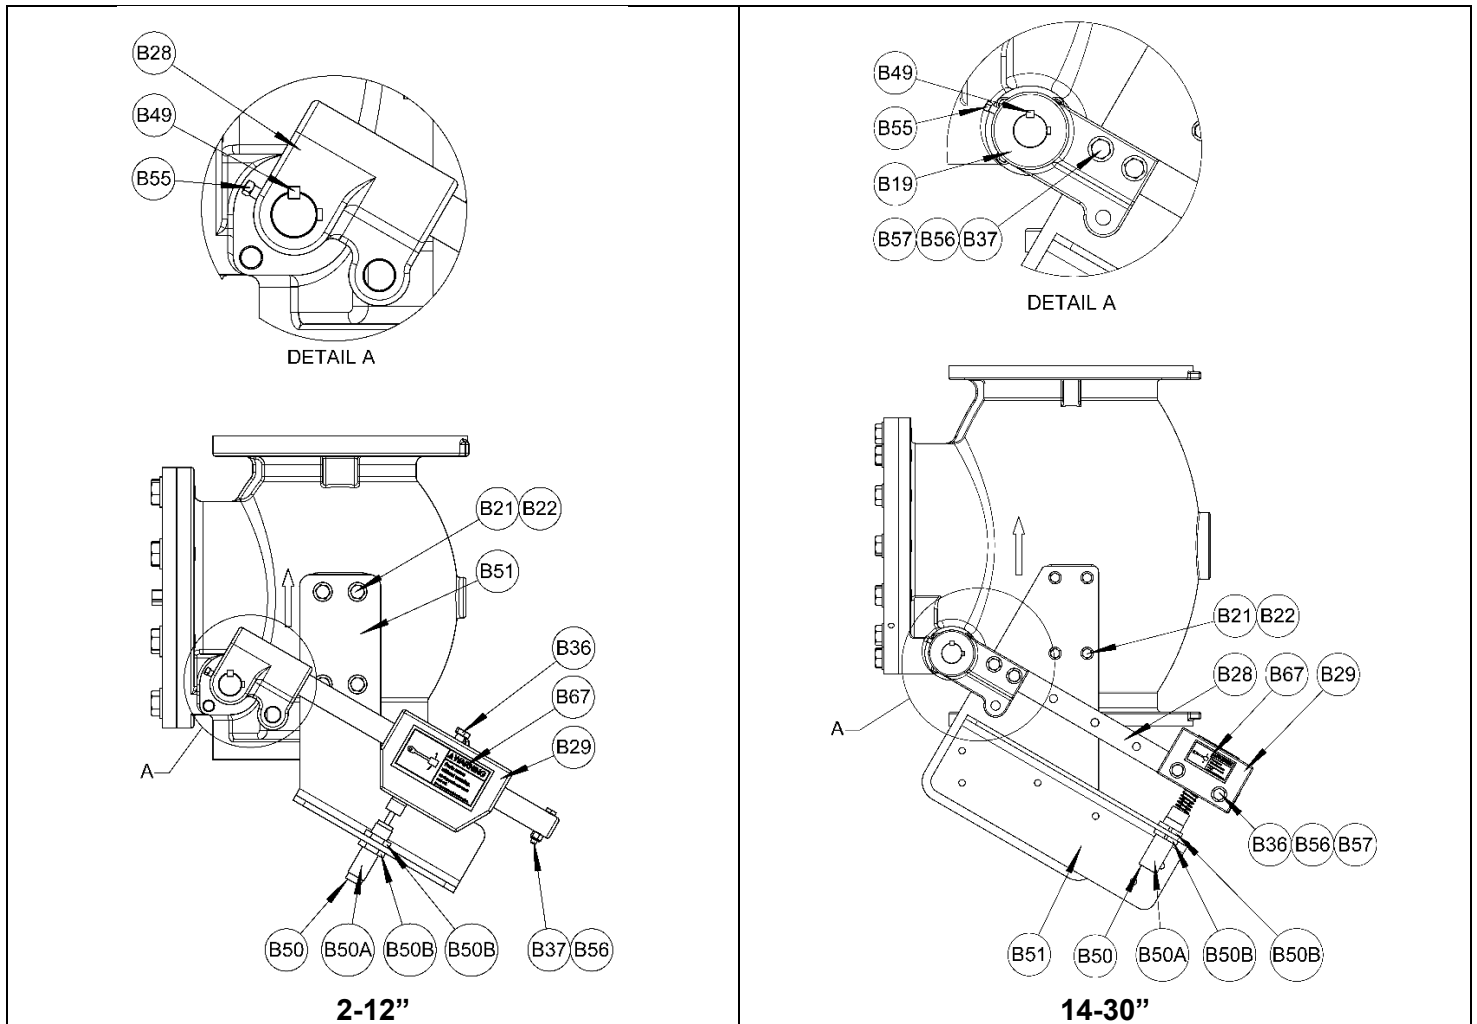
Lever & Weight with Oil Cushion (OB) Assembly 2-30\"
